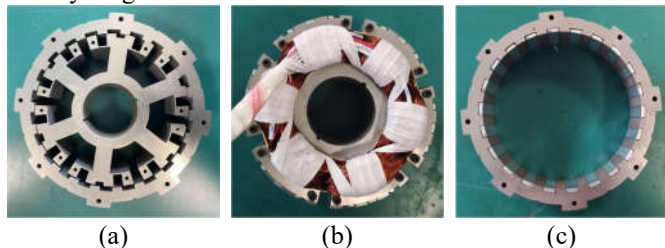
Main components of the prototype. (a) Stator and rotor core. (b) Stator assembly. (c) Rotor assembly.
